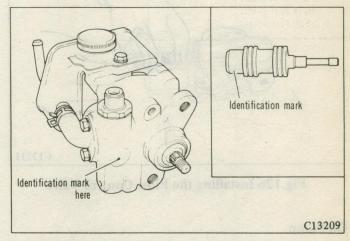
Identification Marking of Flow Control Valve and Pump Body
